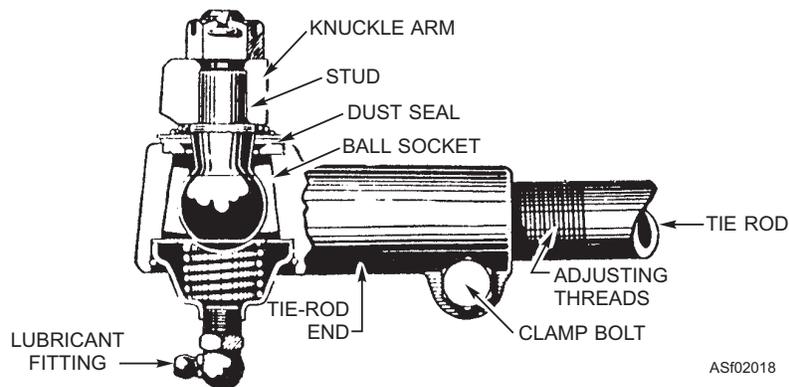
Tie rod end showing clamp bolt and adjusting threads.
